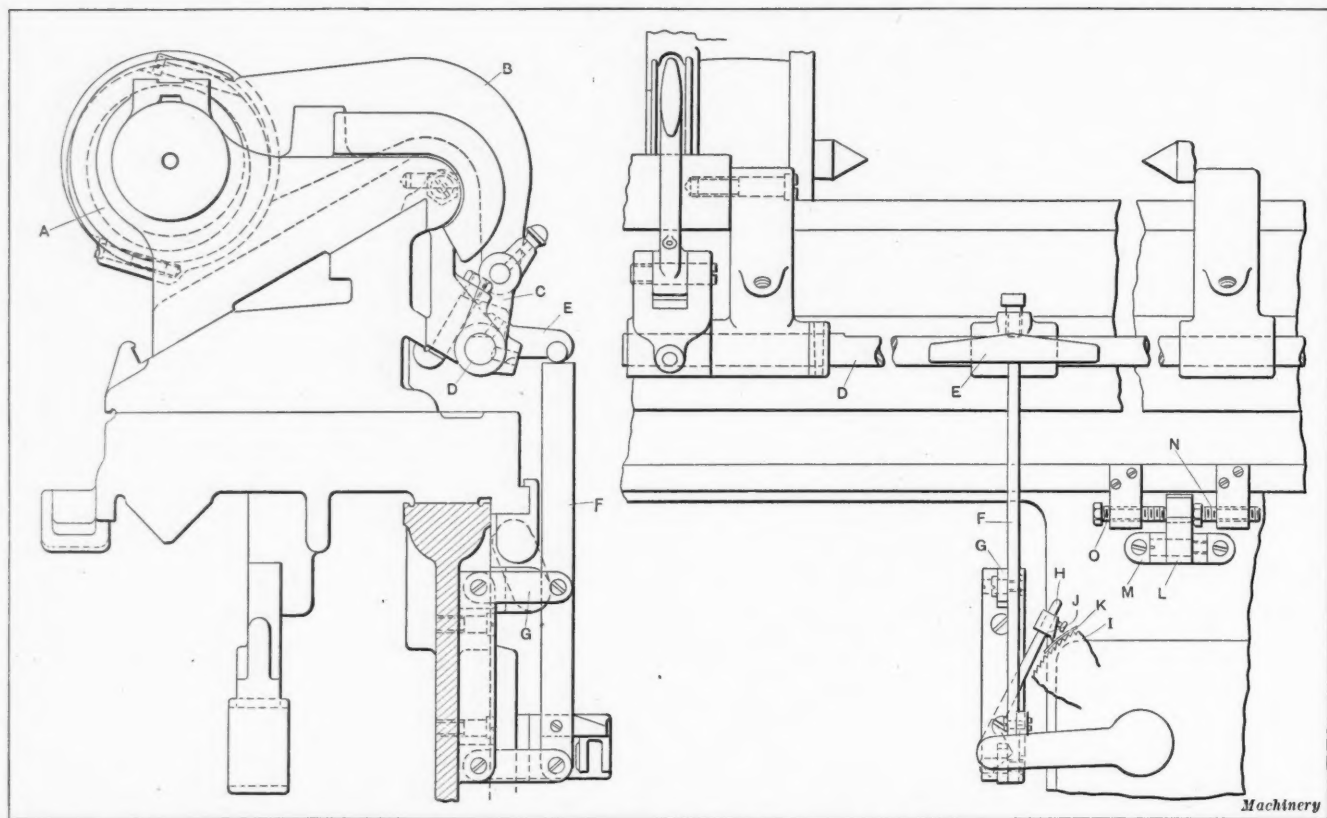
Details of In-feeding Device used on Machine shown in Fig. 36
